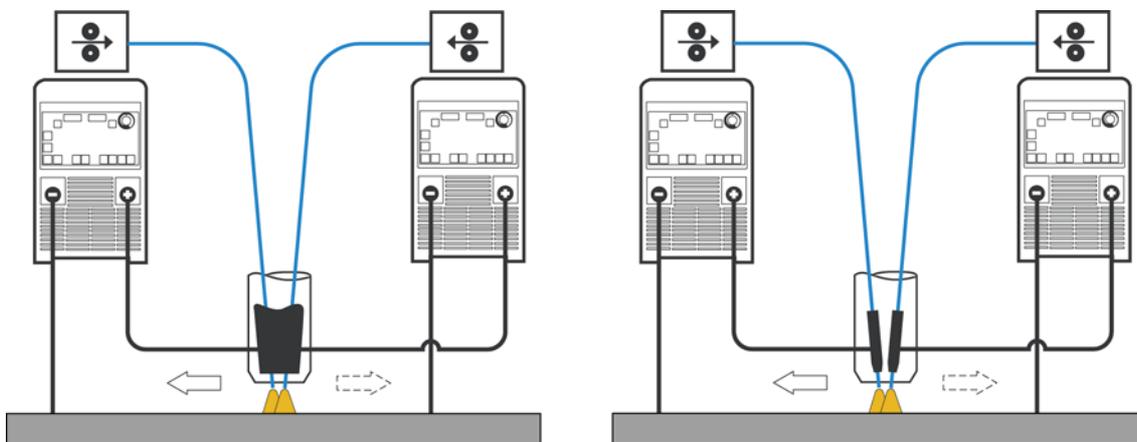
Twin-wire welding with a common contact tube (left) and tandem welding (right) in which the two contact tubes are electrically insulated from one another.
